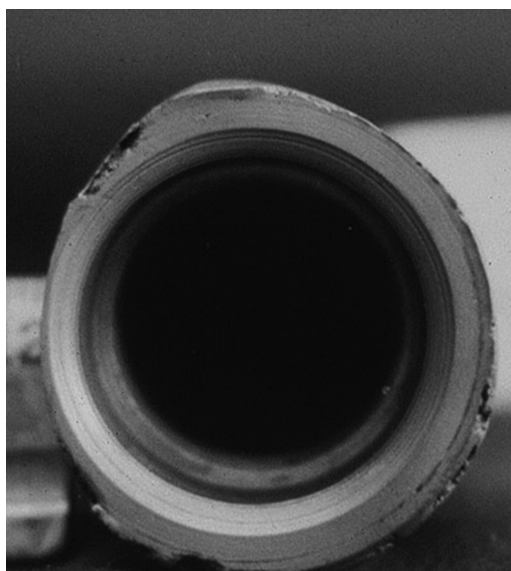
Fretting corrosion of a shackle pin from an FPSO mooring chain. Photo courtesy of Ammonite Corrosion Engineering, <http://www.ammonite-corrosion.com/degrade.html>, accessed September 17, 2010.
